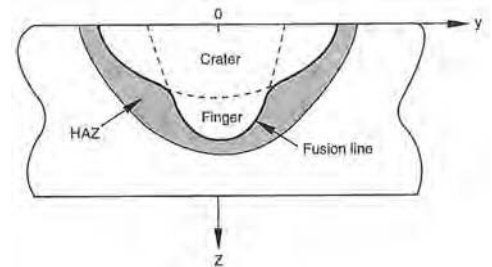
Schematic diagram showing the weld crater/weld finger formation during stringer bead welding. HAZ, heat-affected zone. Source: Ref 1
